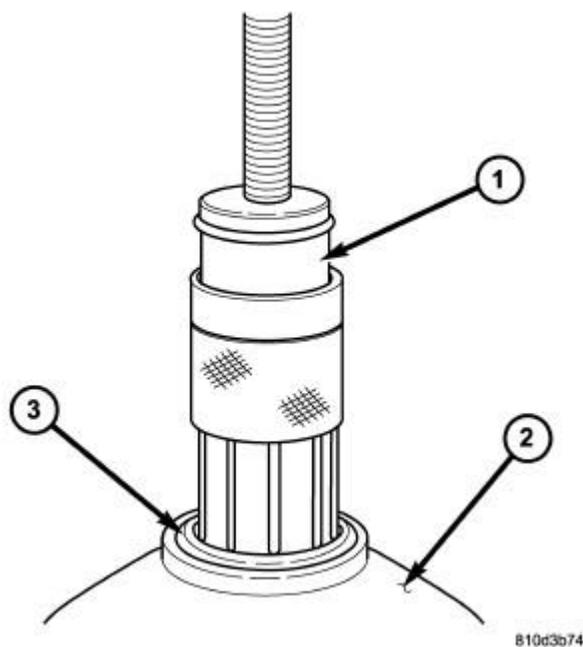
Positioning Bearing Remover 9082A Over Inner Race Of Output Shaft Bearing
